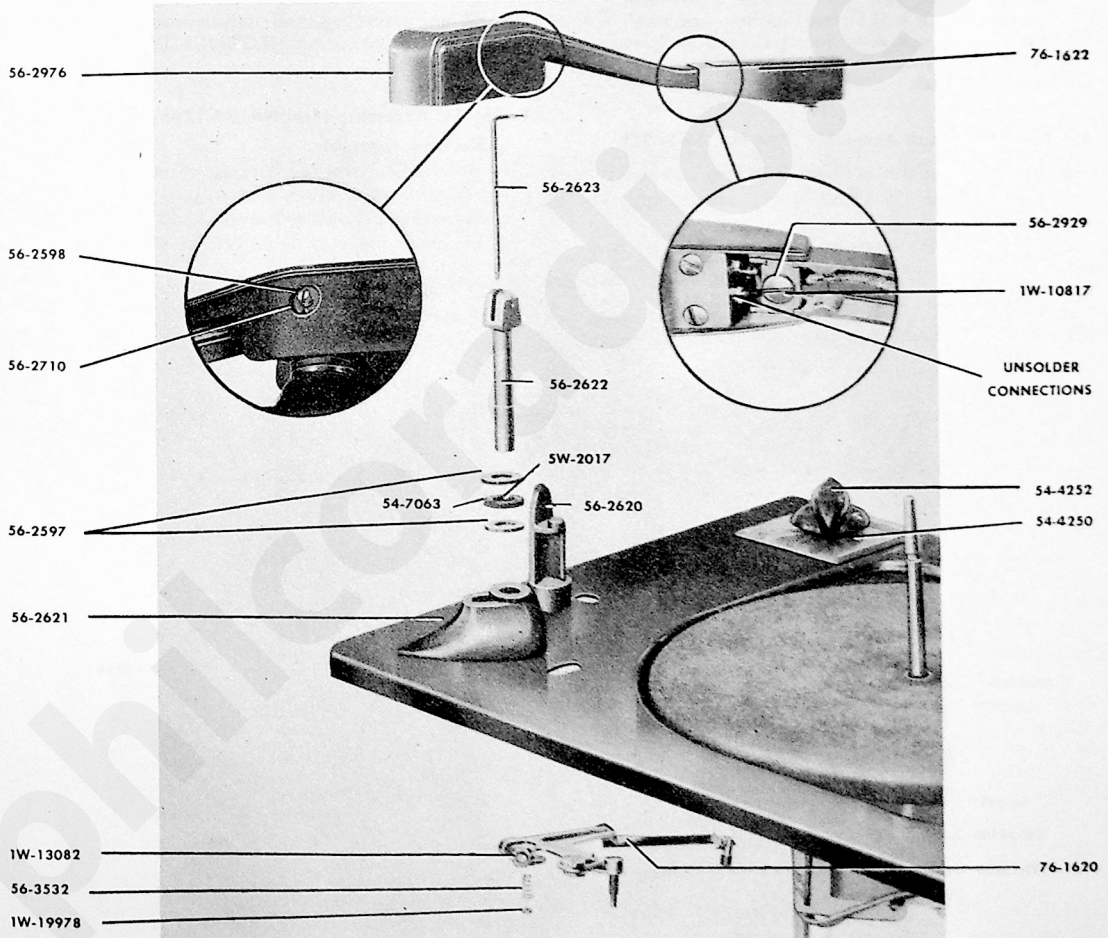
TONE-ARM-SHAFT AND TRIP-ARM ASSEMBLIES, EXPLODED VIEW.
